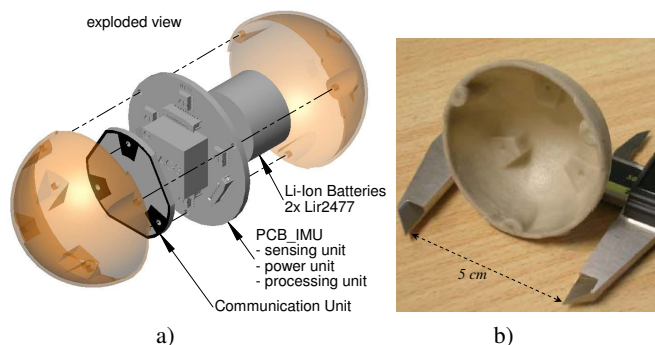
(a) Exploded view of the overall assembly. (b) Outer shell prototype.
